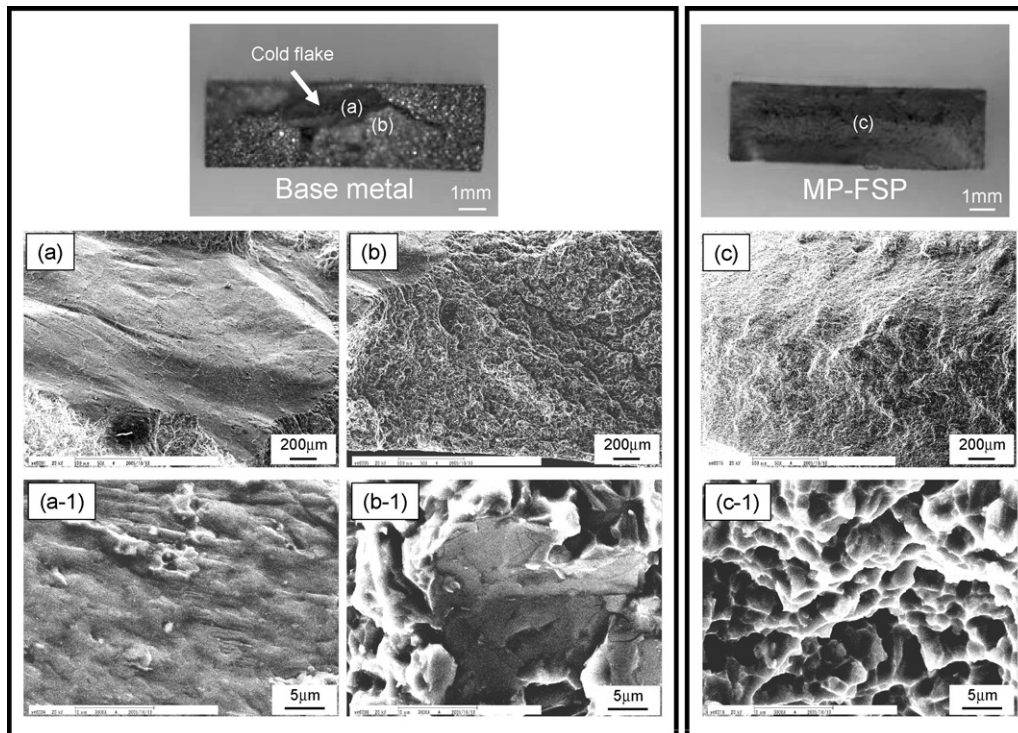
Fracture surface of tensile test specimens in the base metal and the MP-FSP sample; (a-1), (b-1) and (c-1) high magnification of (a), (b) and (c).
